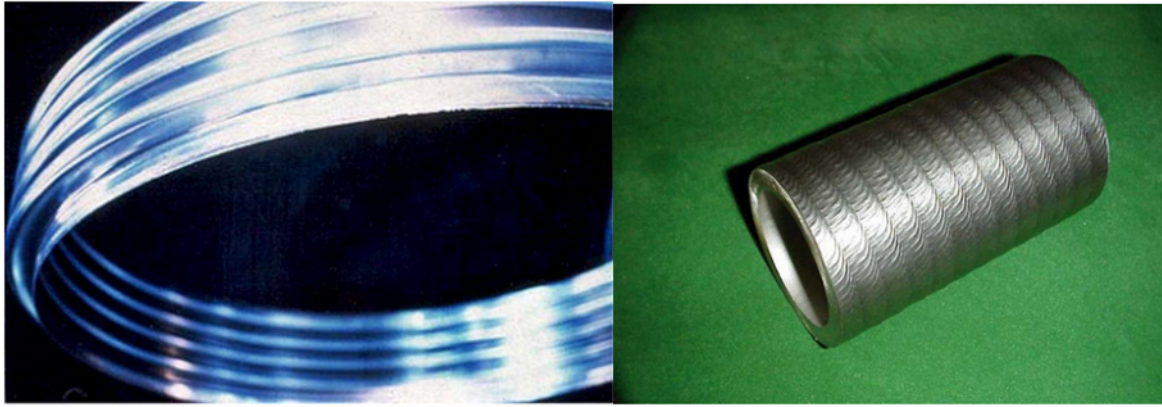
Bellows produced using LCF IN625 (left) & Alloy Steel Boiler Tube Welded using alloy IN625(right) [15]
